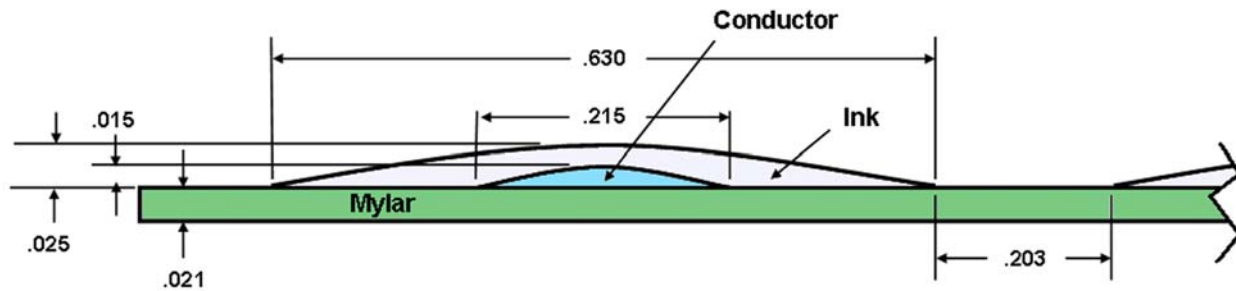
Cross-sectional dimensions (mm) of one ink-covered conductor strip, printed periodically on Mylar substrate.
